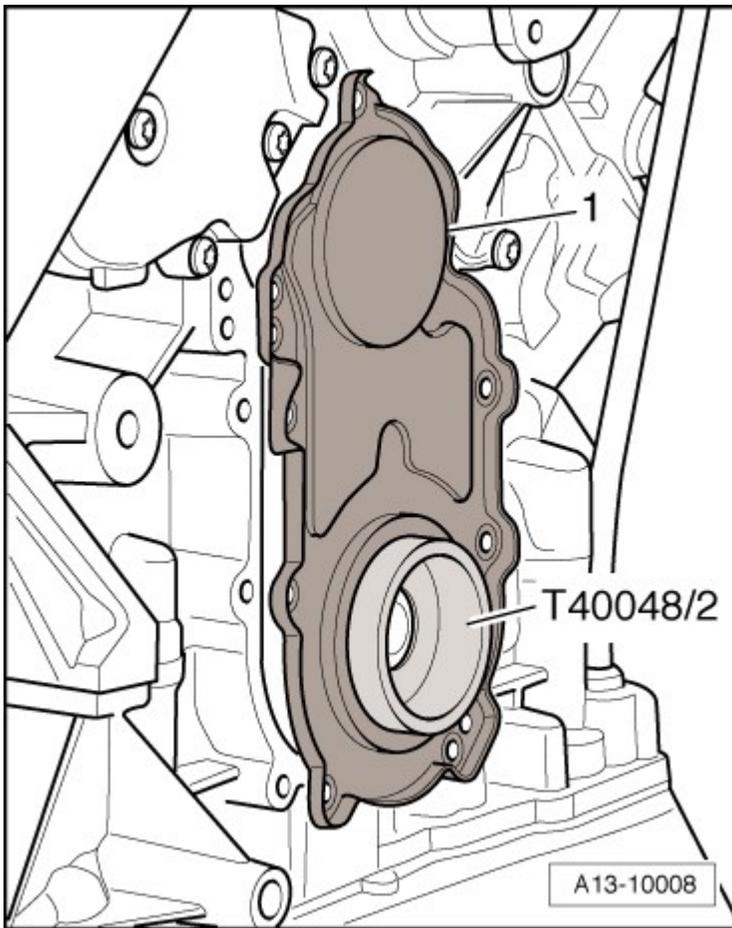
Inserting Assembly Device T40048/1 Onto Pull Sleeve T40048/2 And Sliding Sealing Flange Onto Pull Sleeve
